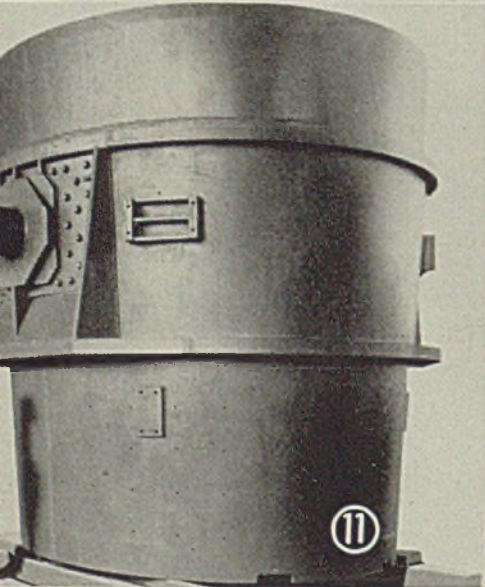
This 130-ton ladle, fabricated entirely from rolled steel, is lighter than other constructions as well as stronger. This reduces crane cost and maintenance. Parts for this giant ladle were flame cut with a portable Radiagraph
